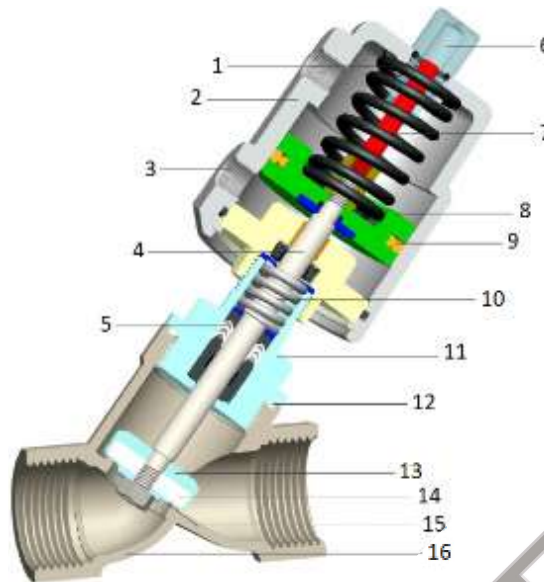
Seat valve with pneumatic control: 1 – indicator; 2 – drive housing; 3 – air connection port; 4 – stock; 5 – rod seals; 6 – cap; 7 – spring; 8 – the piston; 9 – piston seal; 10 – spring; 11 – cover; 12 – sealing of the case; 13 – saddle; 14 – saddle seal; 15 – washer; 16 – housing
